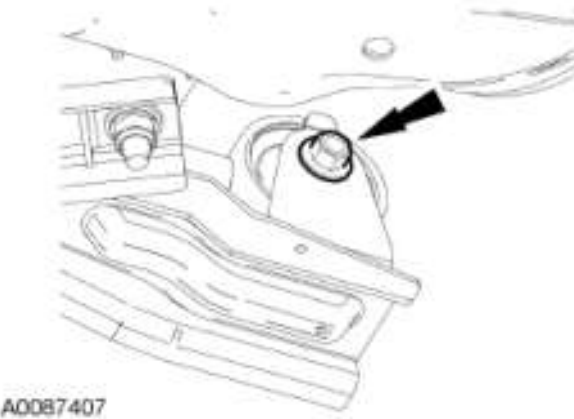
Locating Rear Roll Restrictor-To-Crossmember Bolt
